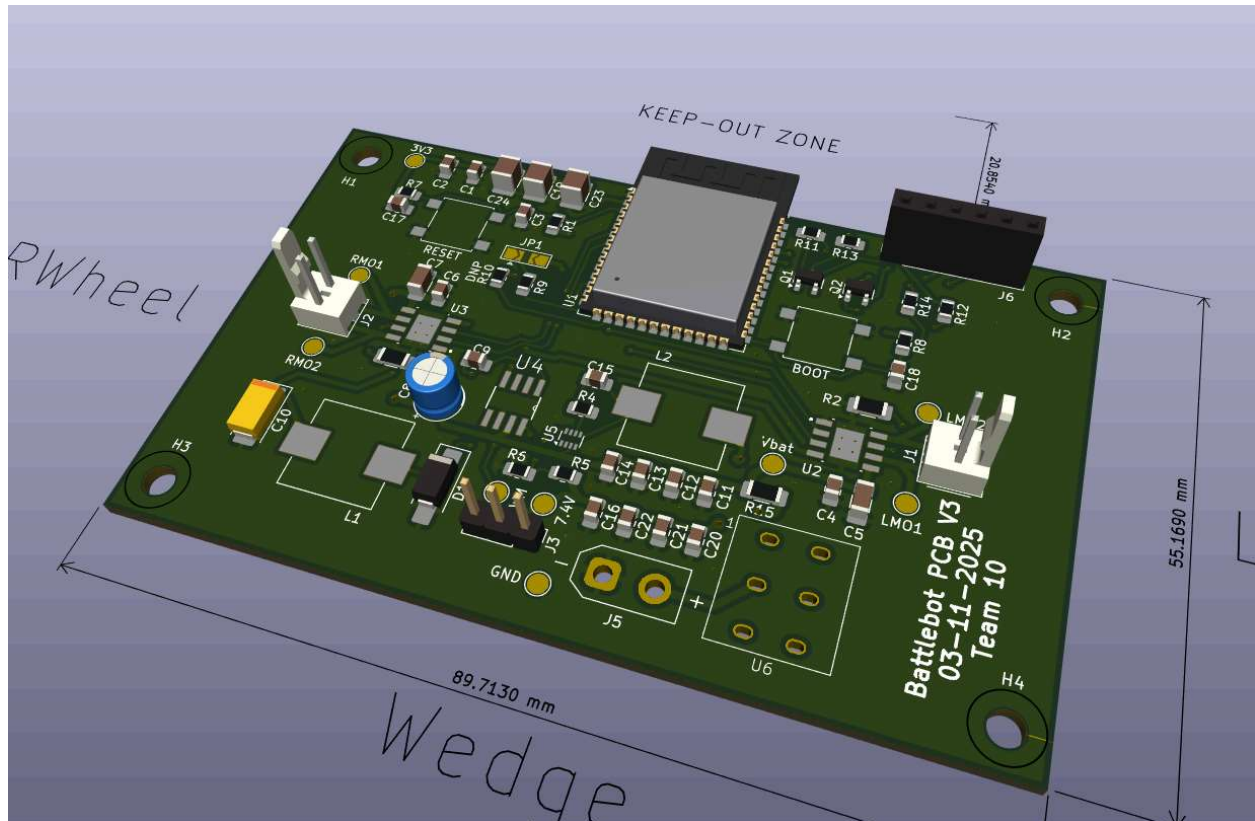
Battlebot PCB in KiCAD 3D Viewer
